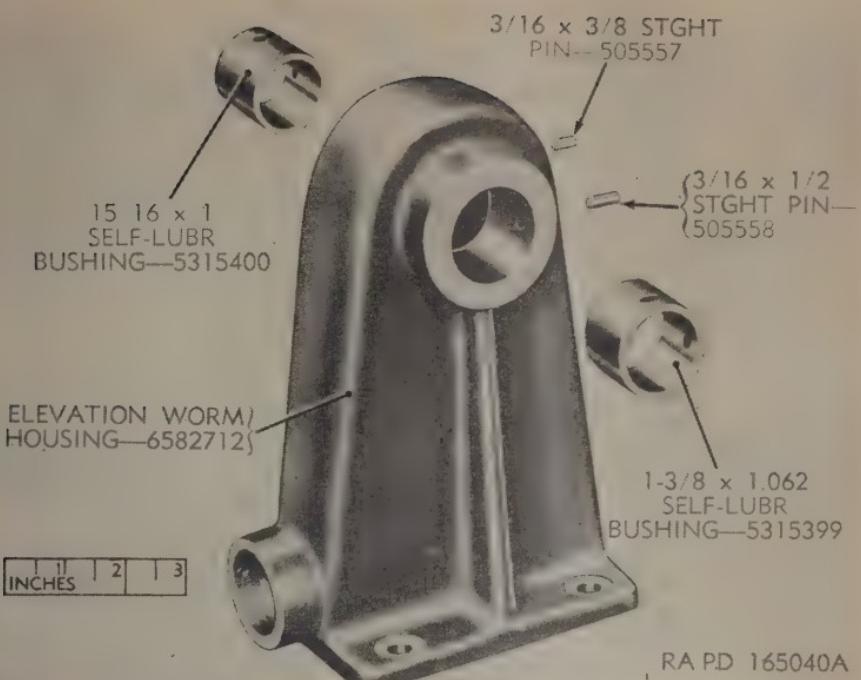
Telescope mounts M52C and M52D—stripped elevation worm housing assembly—exploded view.
